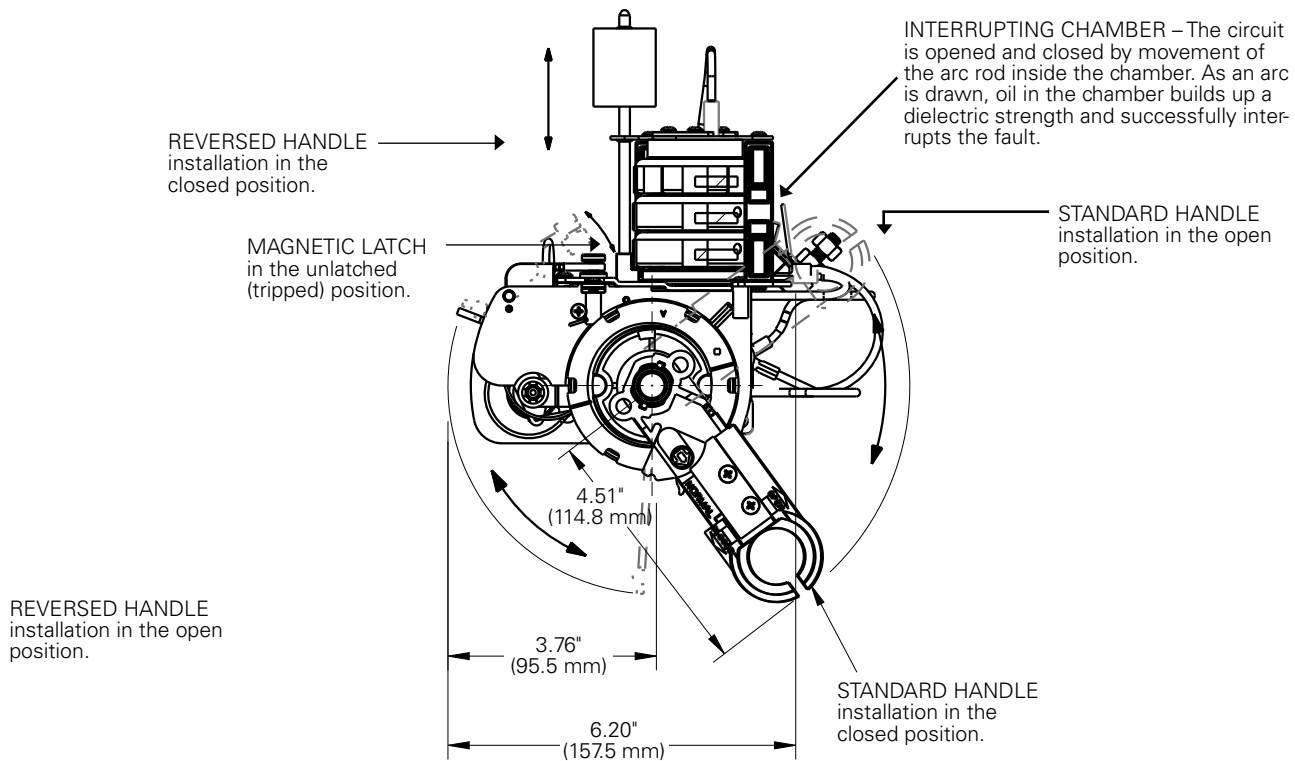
MagneX interrupter showing handle swing – front view with standard handle.
